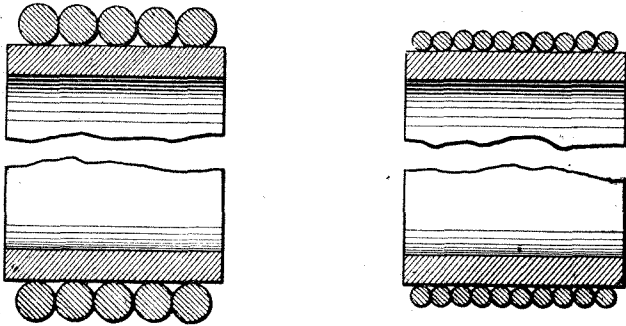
With a given shape of coil, to obtain a larger number of turns, a smaller gauge of wire must be used.
